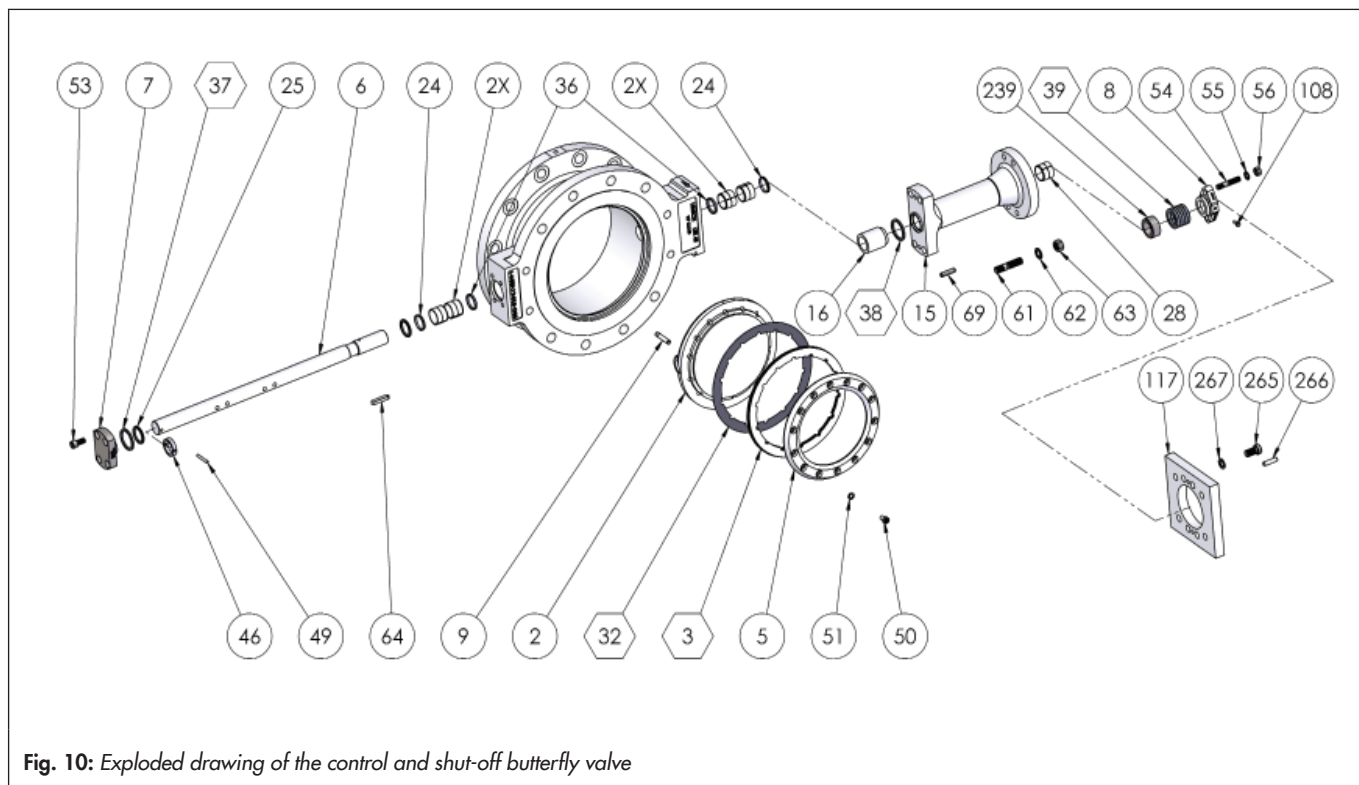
Exploded drawing of the control and shut-off butterfly valve
